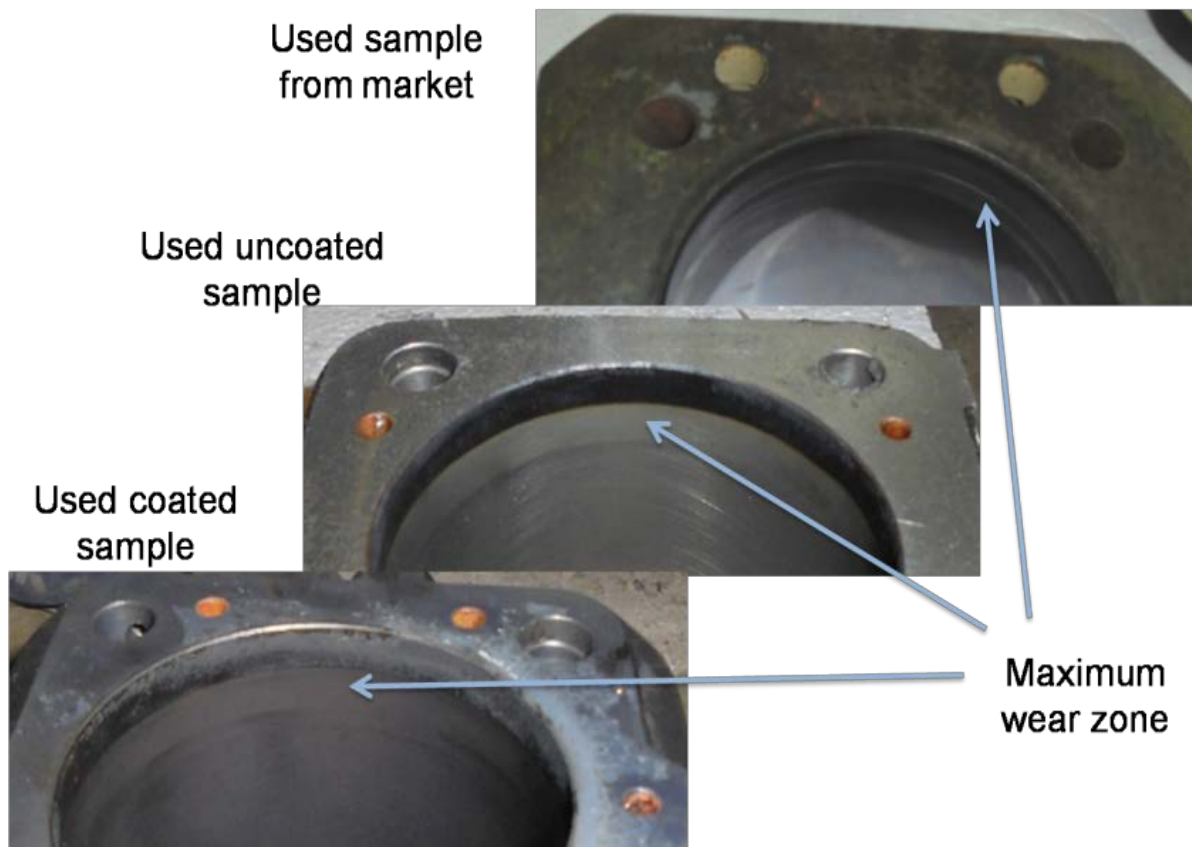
Photograph of used engine cylinder (from present investigation and market); showing maximum wear zone in inner surfaces of all the engine cylinder
